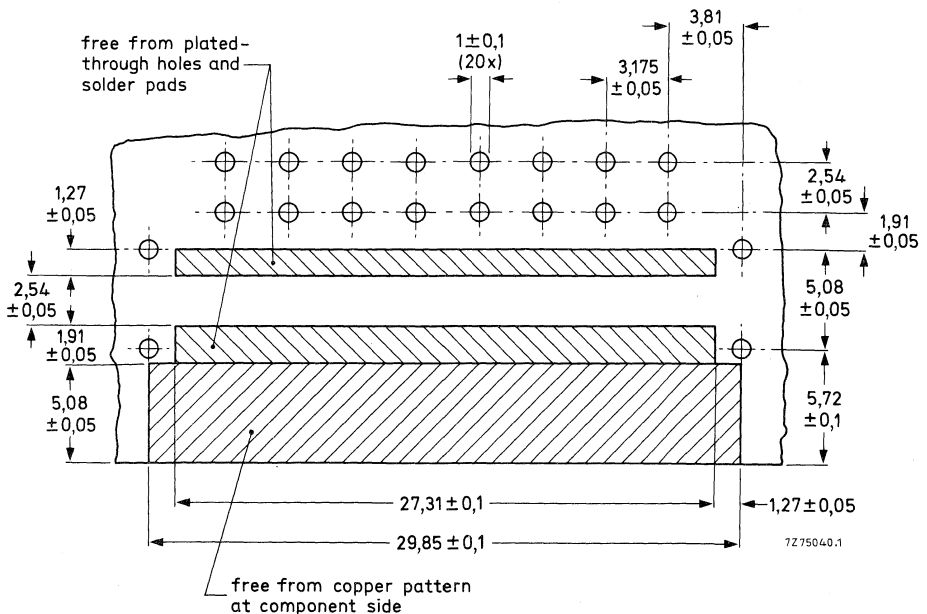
Hole pattern for the spring contact box with 16 pins.
